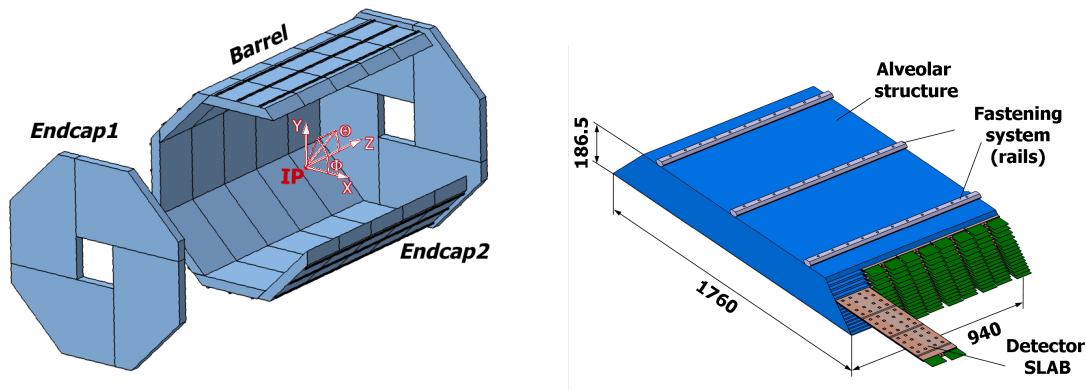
Global layout of the ECAL (left) and layout of one module (right).
